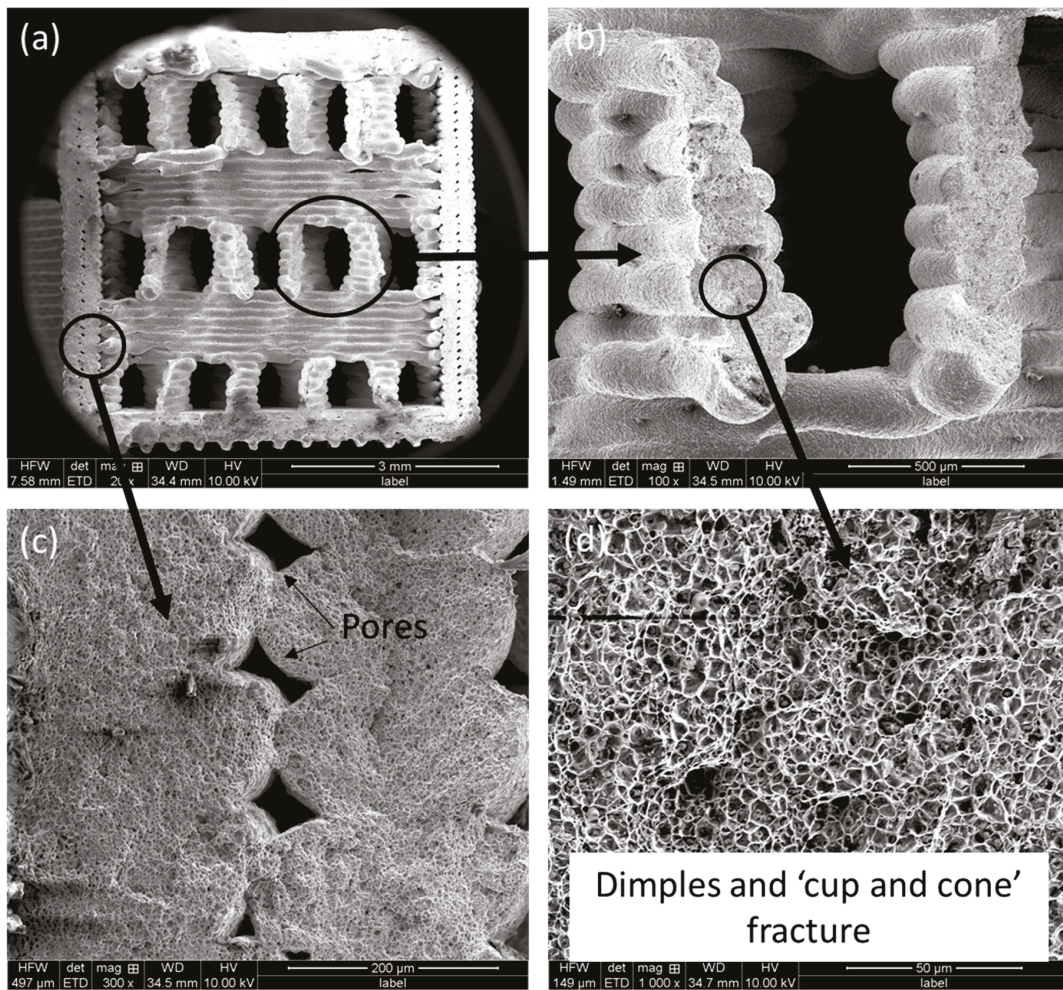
Fractography after tensile testing on a representative gyroid infill pattern specimen (MF, GYR, 0.5 SHELL): (a) overall fractured surface showing individual metal strands, (b) high-magnification view of metal strands, (c) pores among metal strands on shell wall and (d) dimples and ‘cup and cone’ representing ductile fracture.
